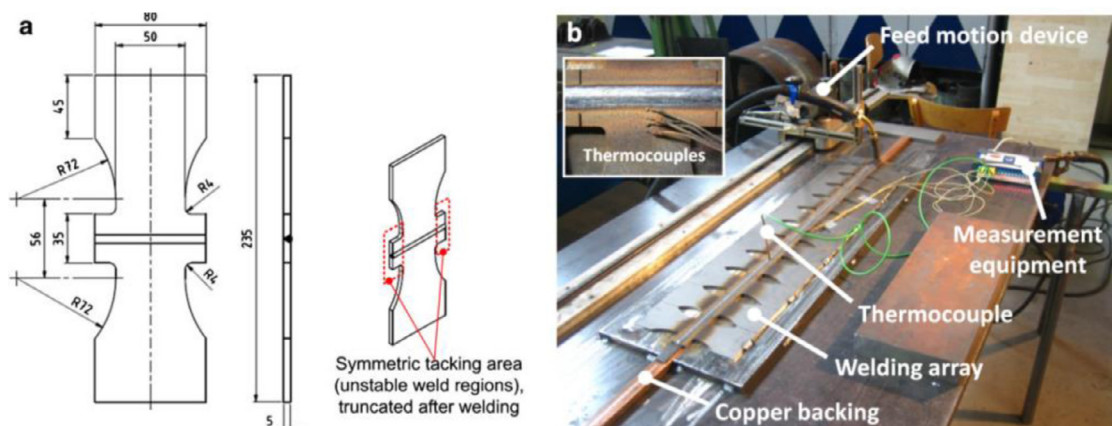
Specimen geometry and set-up of welding array [4].
